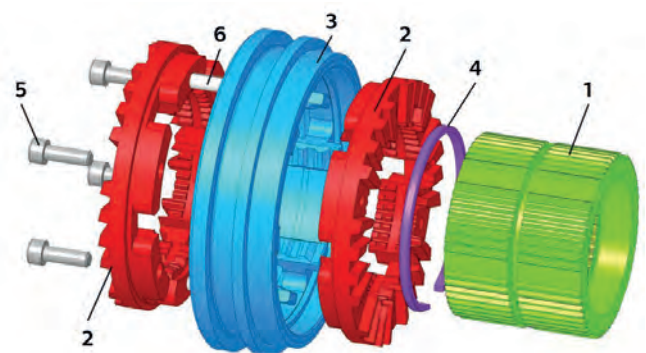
Final dog clutch with blocking mechanism design (1-hub; 2-sliding gear; 3-gearshift sleeve; 4-blocking ring; 5-screws; 6-pins).
